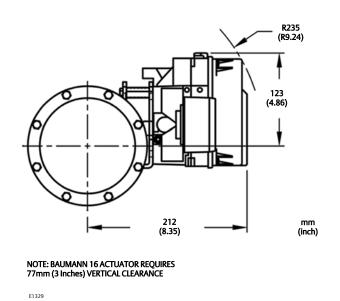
81000 Inline Valve with Baumann 16 Actuator and FIELDVUE DVC6000 Digital Valve Controller
